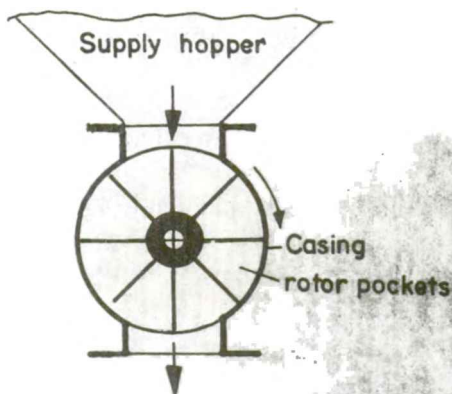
Rotary feeder for pneumatic conveyor
